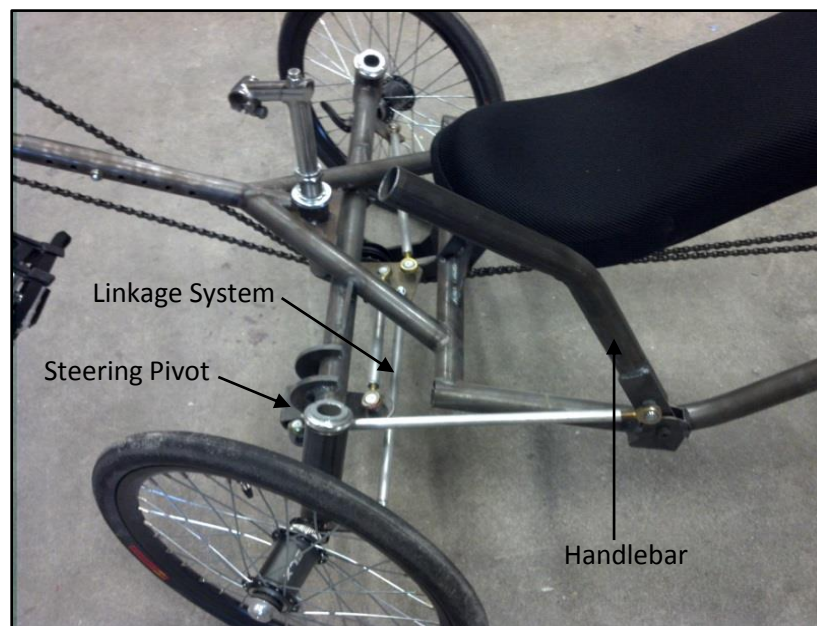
A photograph of the previous team's steering design where the front wheels turn by pushing and pulling on the steering handle.
